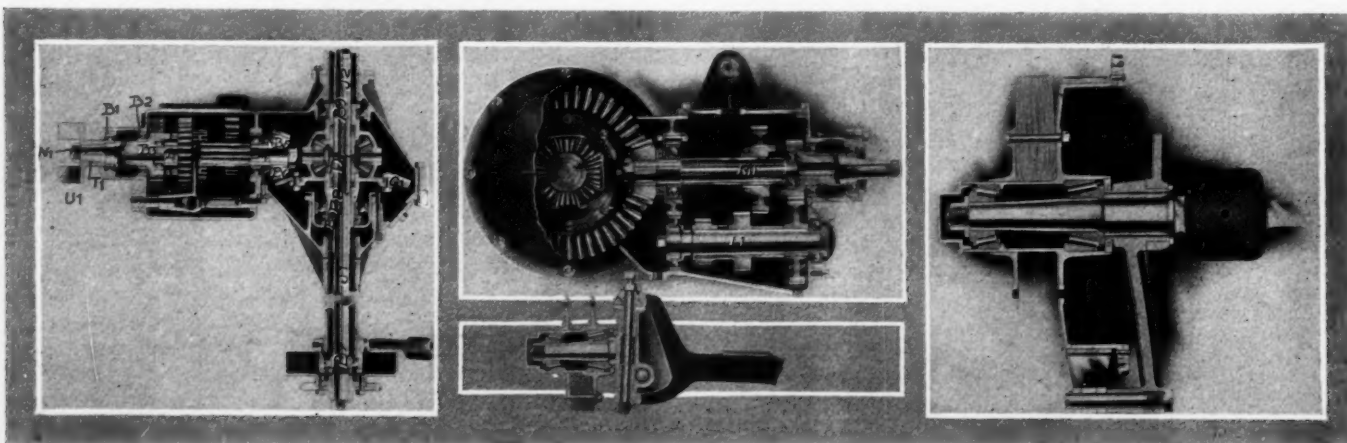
Sectional plan view of transmission, differential and jackshaft. Fig. 7—Sectional view, side elevation of transmission and differential. Fig. 8—Front axle, presenting sectional view of steering knuckle pin, bearings, and hub. Fig. 9—Sectional view of rear brake drum and wheel bearings
